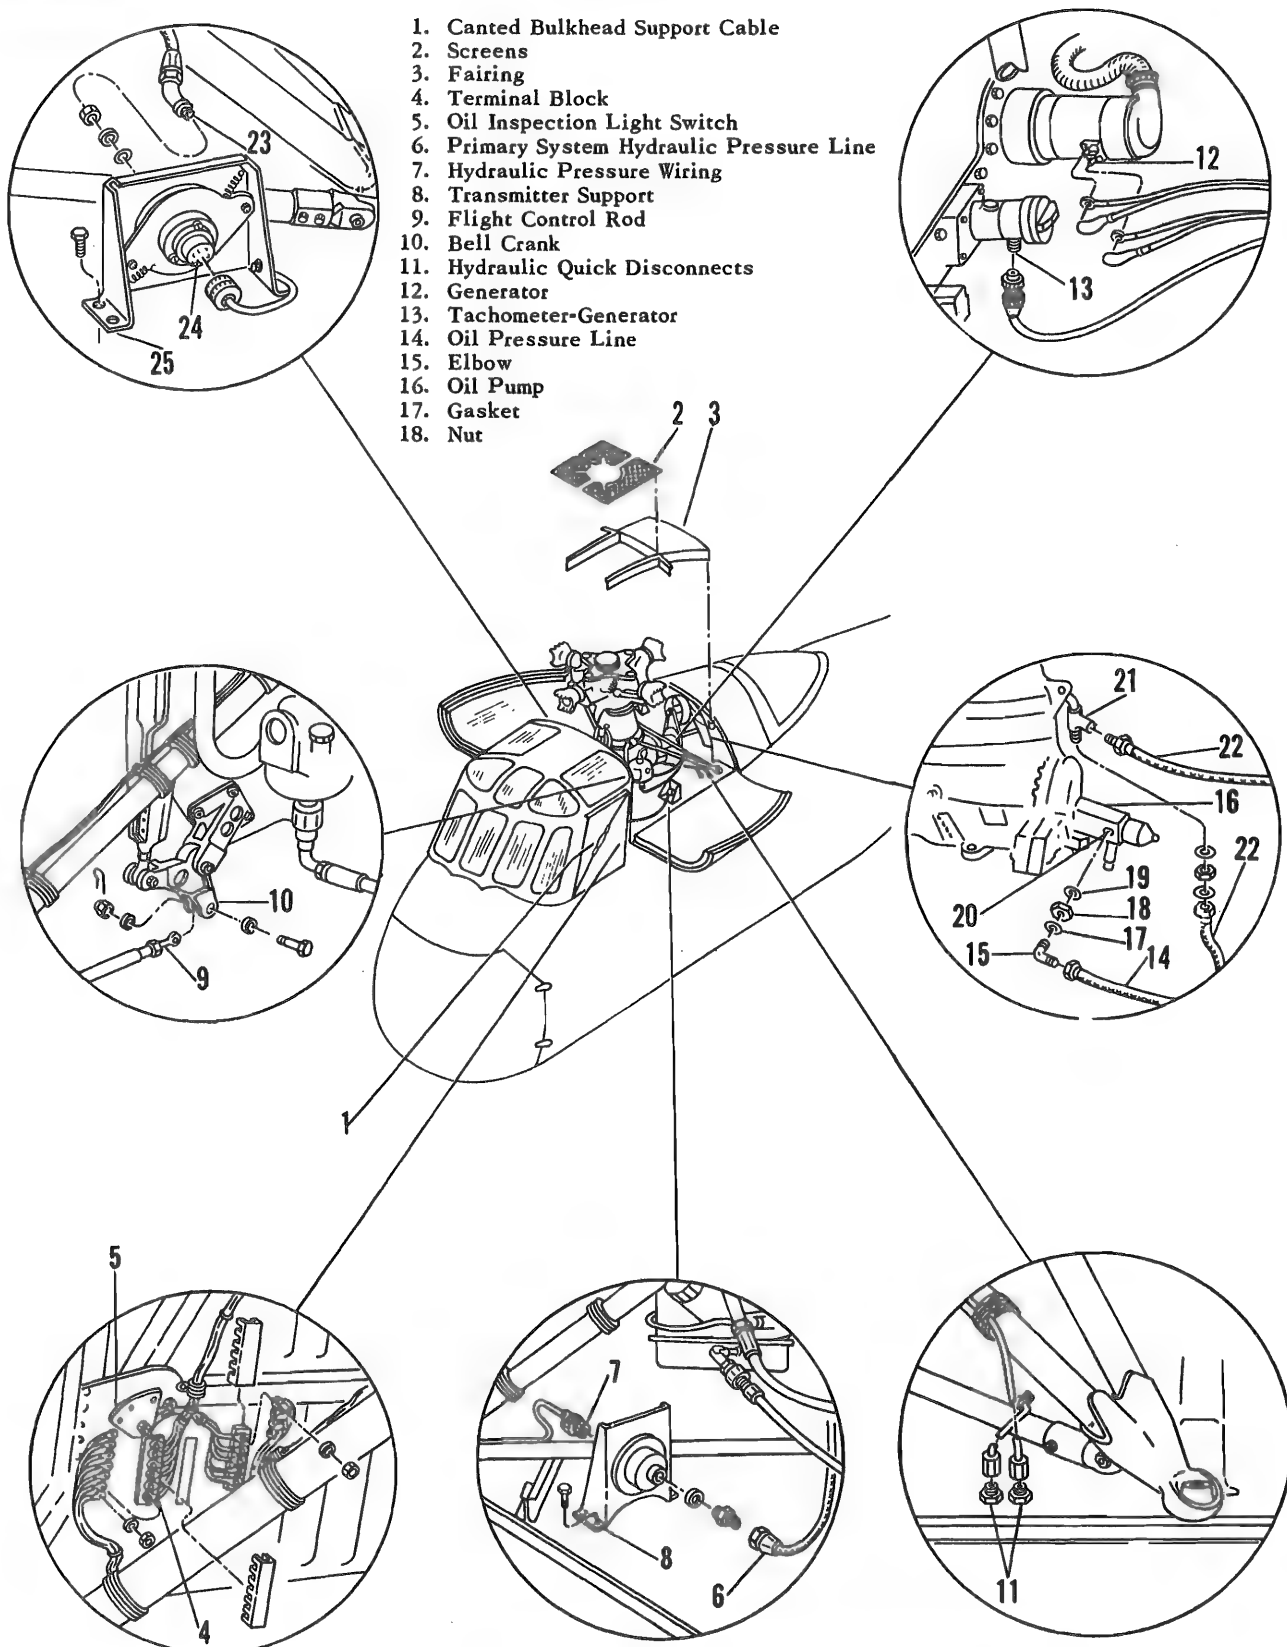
Main Gear Box and Rotor Quick Change Unit Removal (Sheet 1 of 2)
